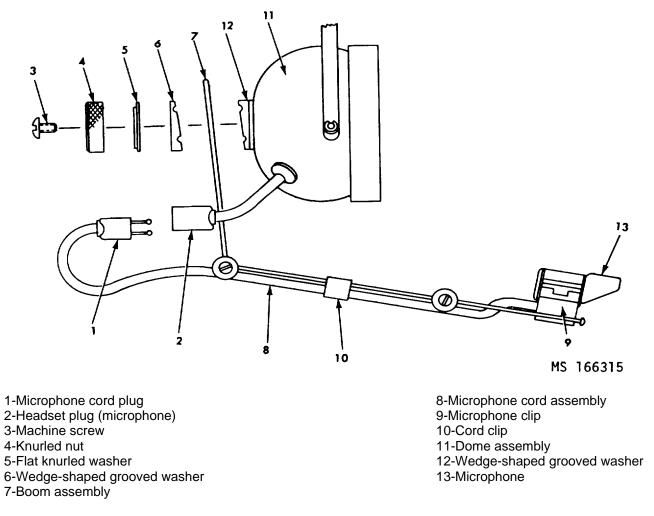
Headset, boom assembly, and microphone cord assembly-exploded view.
